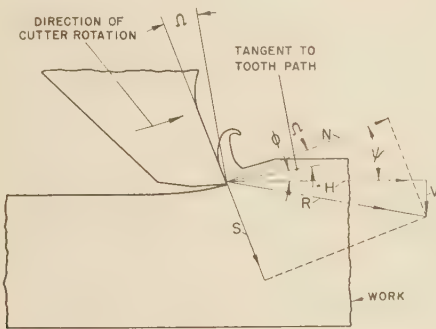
FORCE DIAGRAM SHOWING RELATIONSHIP OF FORCES AT EDGE OF A MILLING-CUTTER TOOTH
